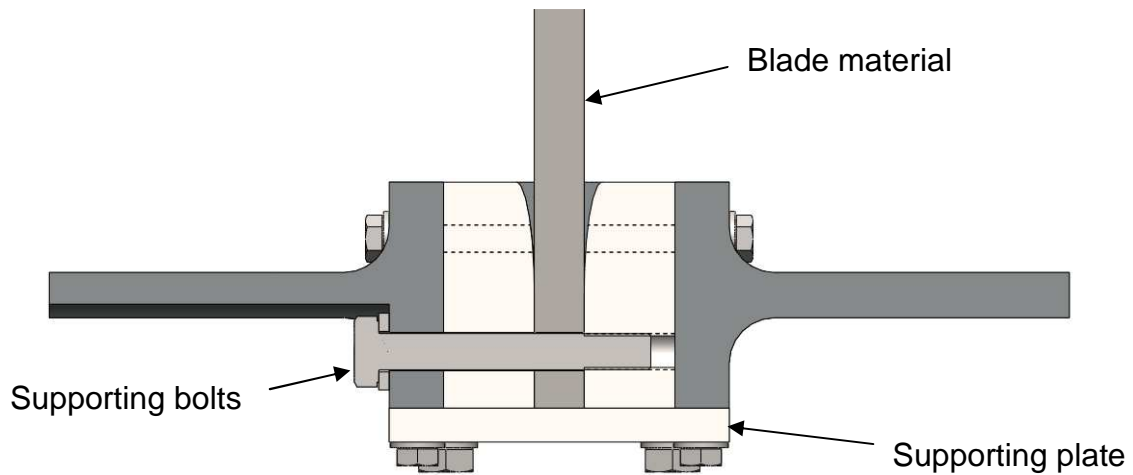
3D CAD cross section of lower clamp illustrating the function of the blade material supporting bolts and plate
